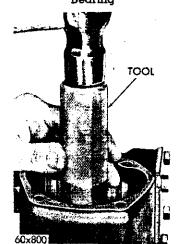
Installing the Gear Shaft Housing Inner Bearing
